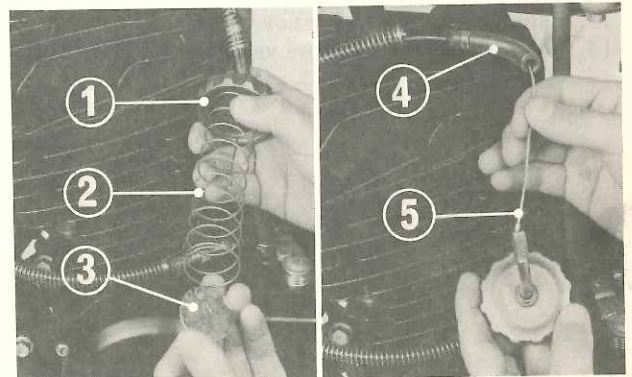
(1) Carburetor top (2) Spring (3) Clip plate (4) Rubber cap (5) Throttle cable
